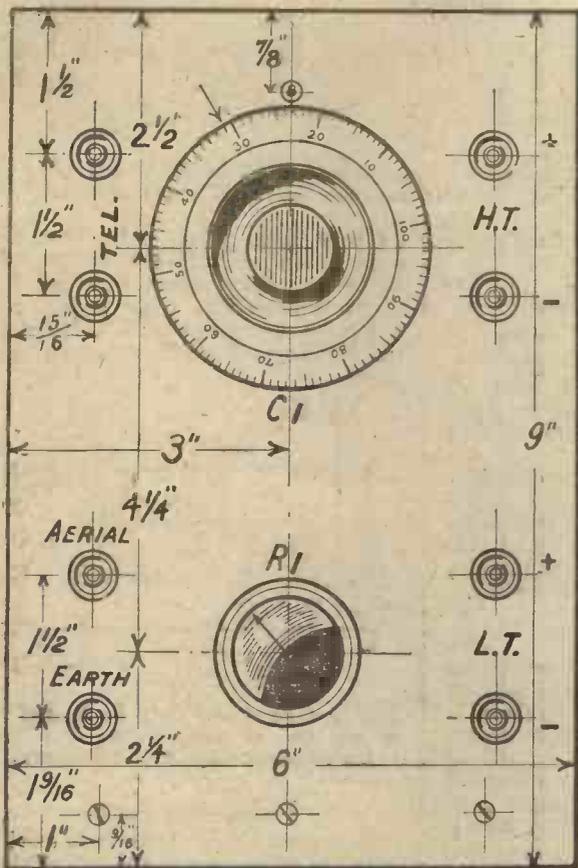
This diagram will provide drilling dimensions for the panel. Also obtainable as a blueprint, No. C.1064A.
